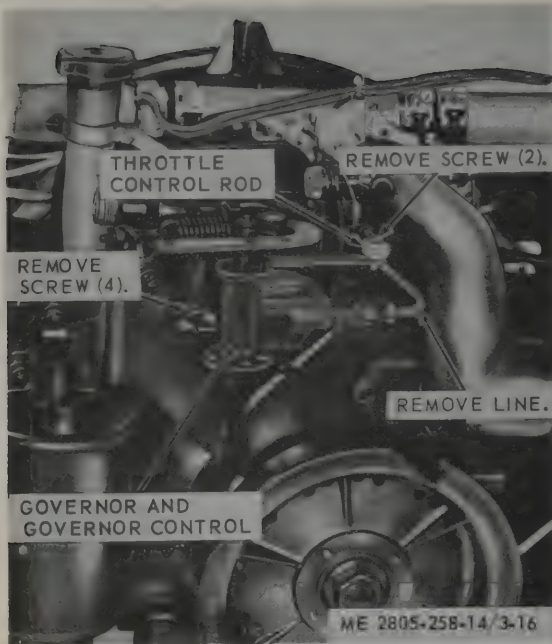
Governor, governor control, and throttle control rod, removal and installation.
